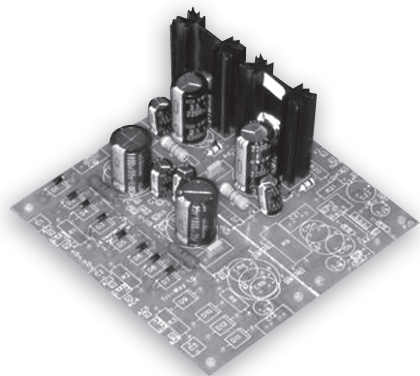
The Tri-Way board, with most of the parts installed for use in a compressor.
